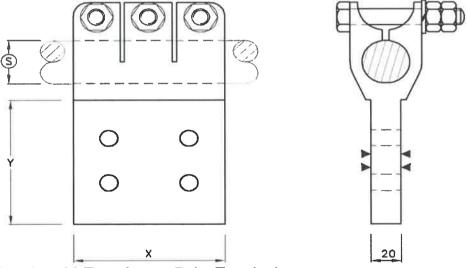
SPC – Type Palm Clamp to Stranded Conductor (Crimping)
